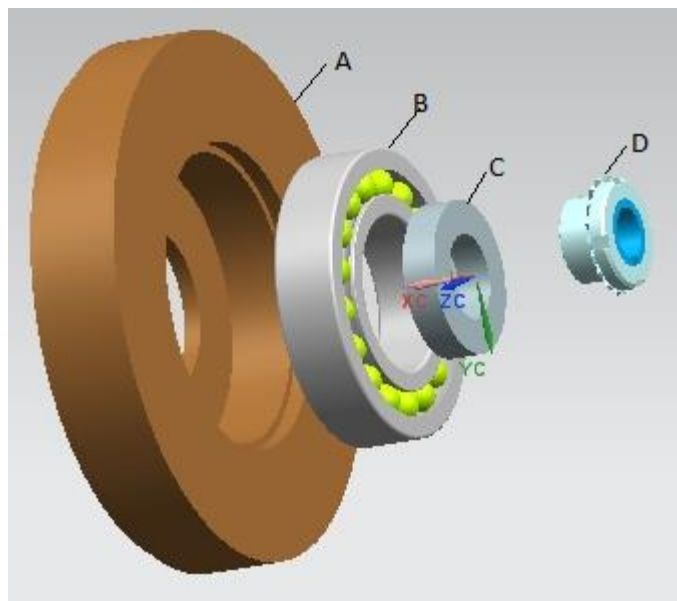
Touchdown bearing assembly (A=Touchdown housing, B= Ball bearing, C=Touchdown disc, D= coupling element)
